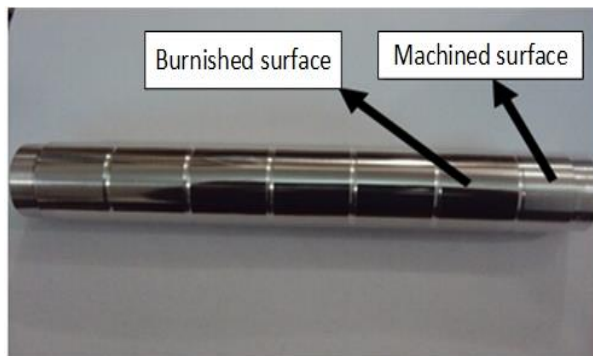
Example of a burnished 2024 aluminium workpiece.
